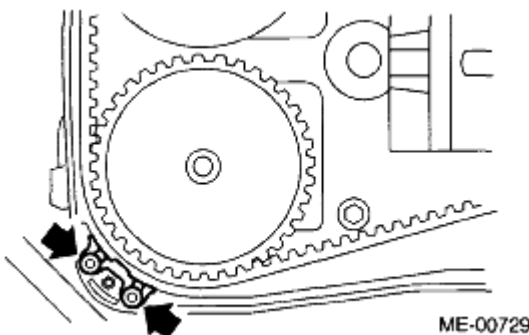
Identifying Timing Belt Guide Mounting Bolts (4 Of 4)
